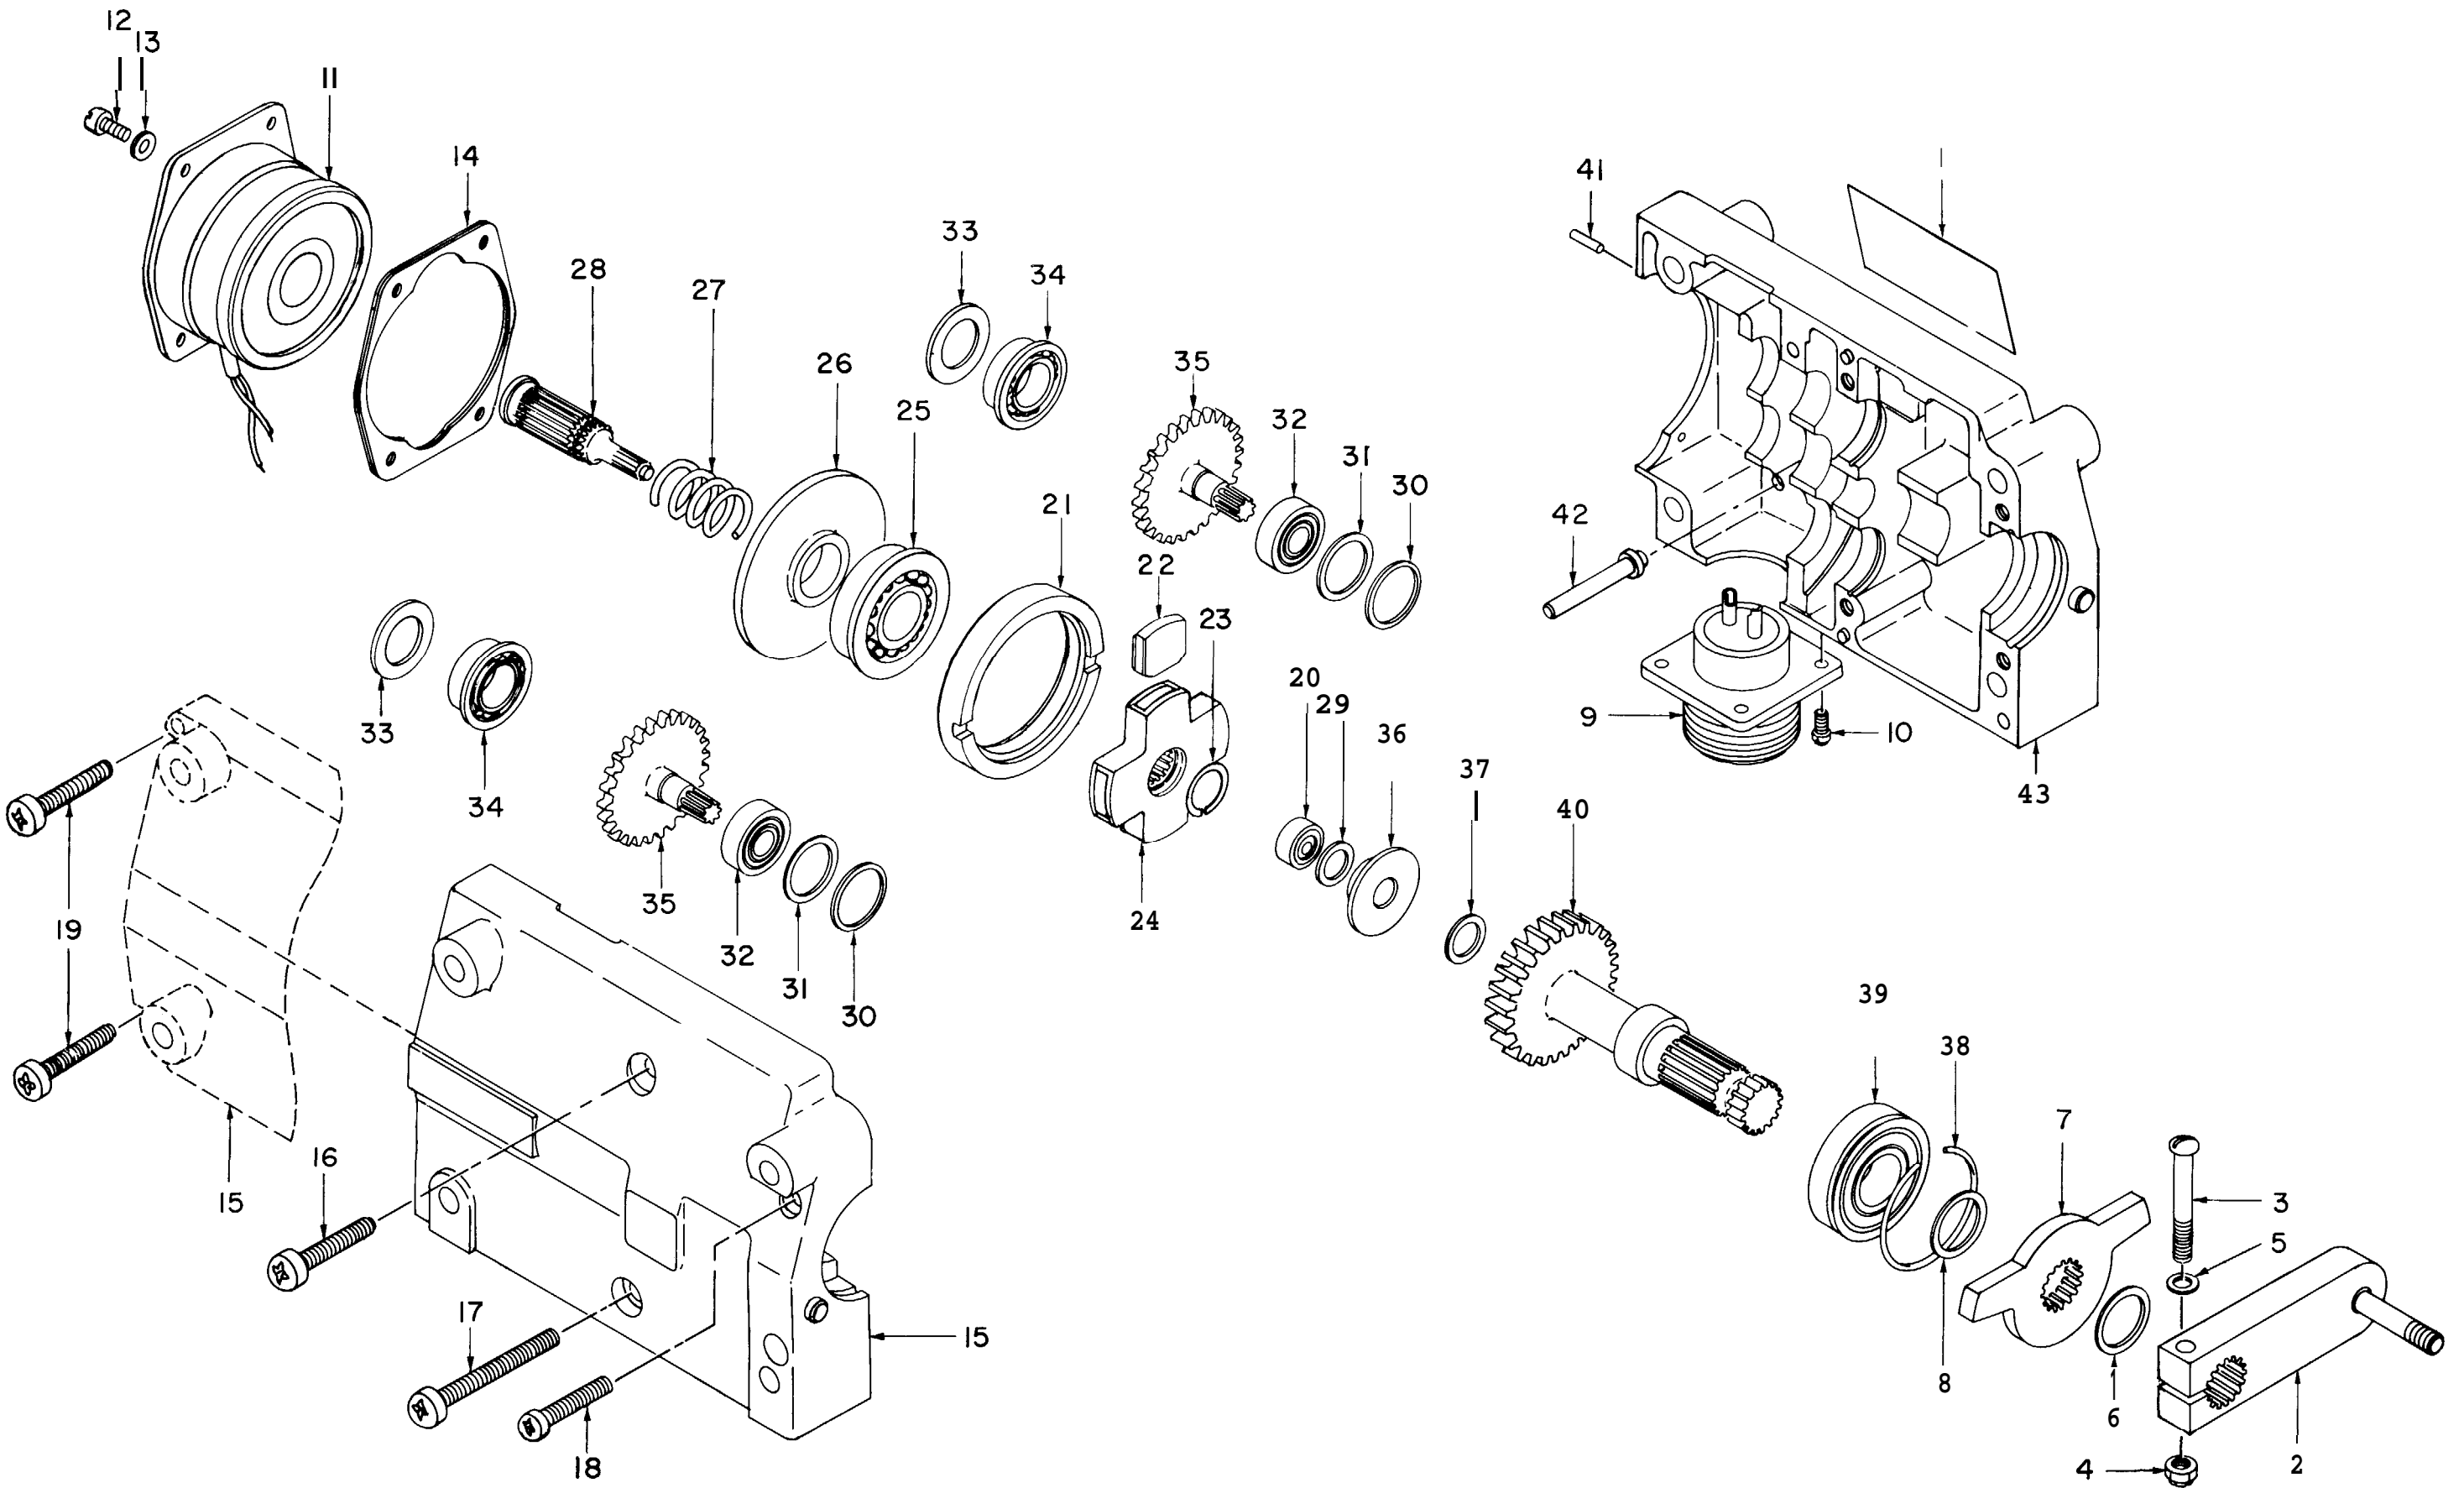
Magnetic Brake, Exploded View, Part No. R460M15-11.
